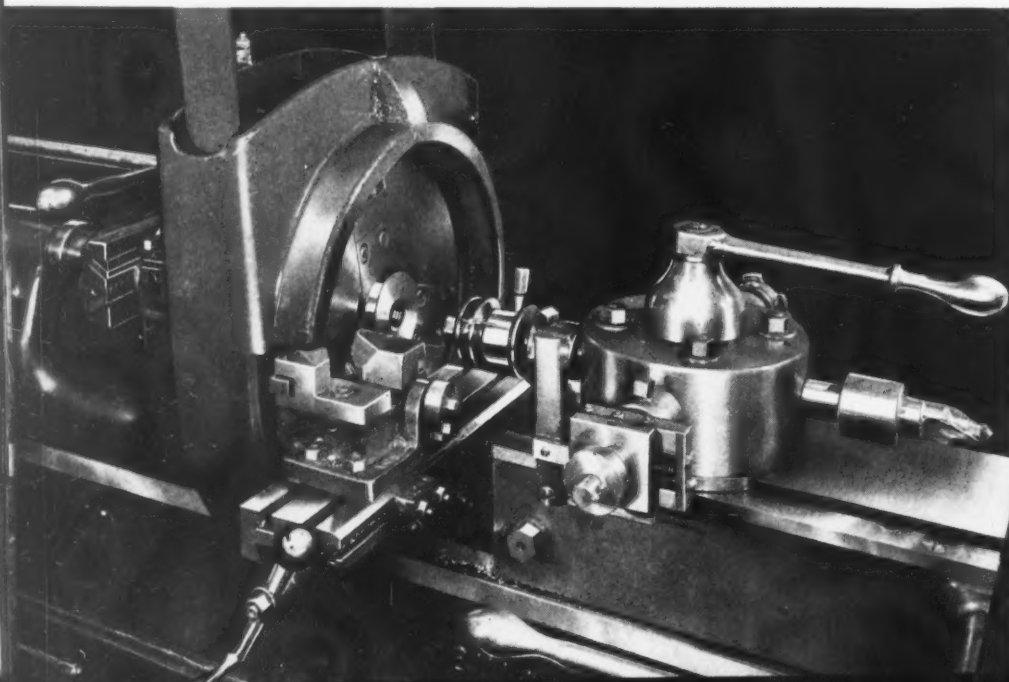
Turret Lathe Provided with a Turret and Cross-slide at the Right-hand Side of the Headstock for Machining the Base End of Cartridge Cases, and with an Auxiliary Slide at the Left-hand Side of the Headstock for Trimming the Mouth End
